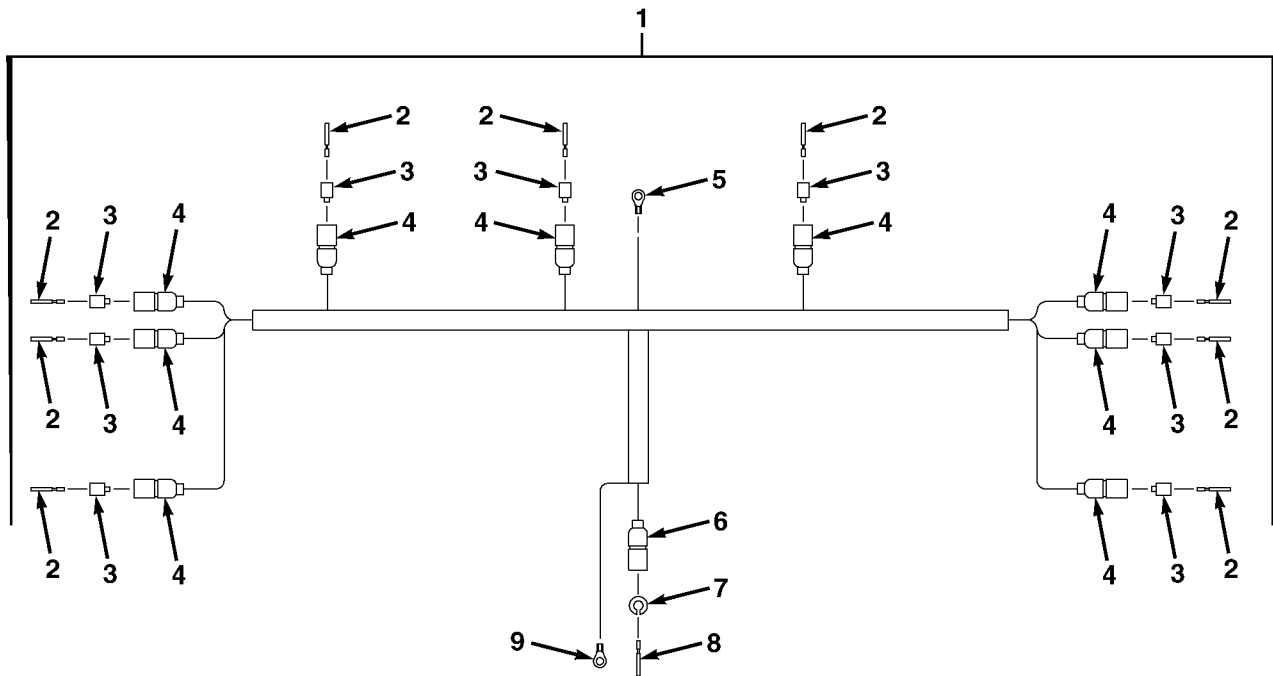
CLEARANCE LIGHT WIRING HARNESS REAR
